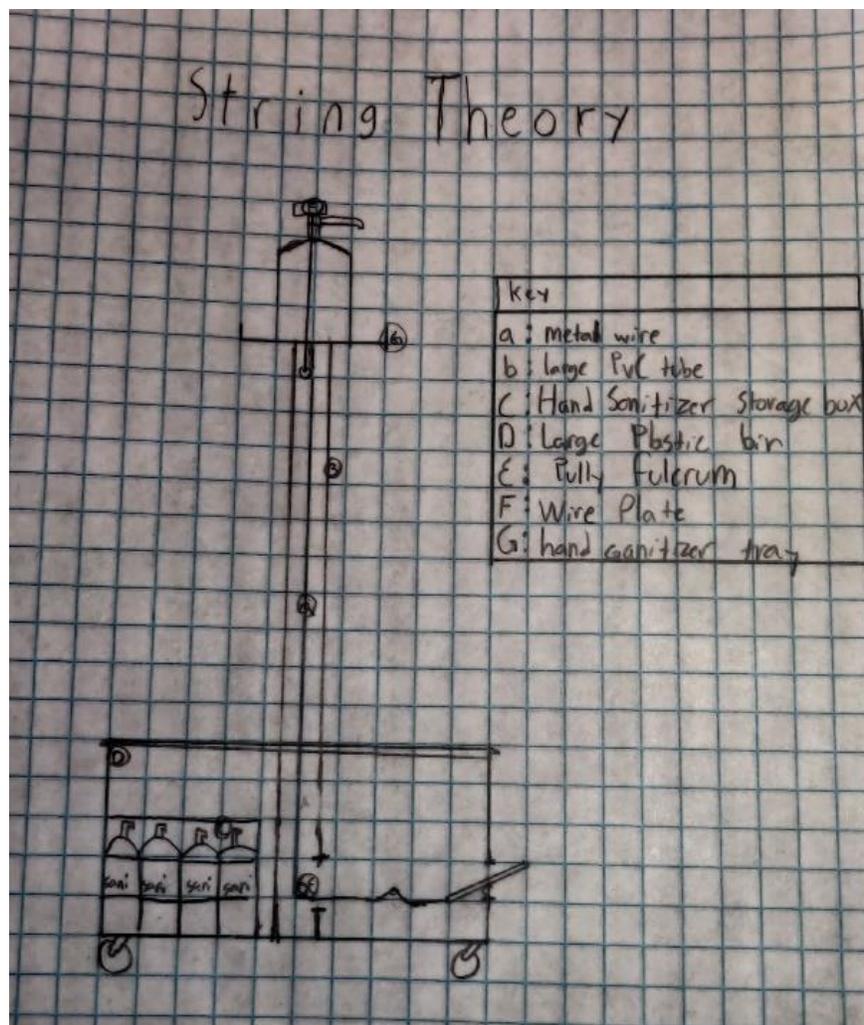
Initial Sketch of String Theory Design (Drawing by Ben George).
